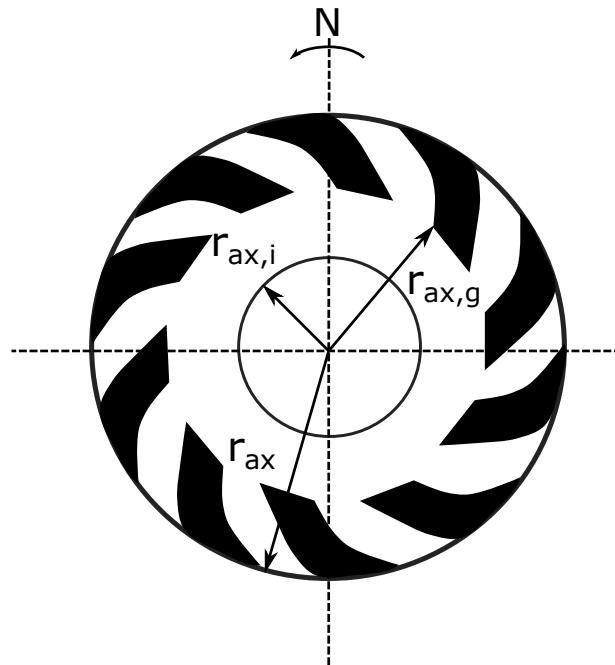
Schematic of a Spiral Groove Thrust Bearing (SGTB)
